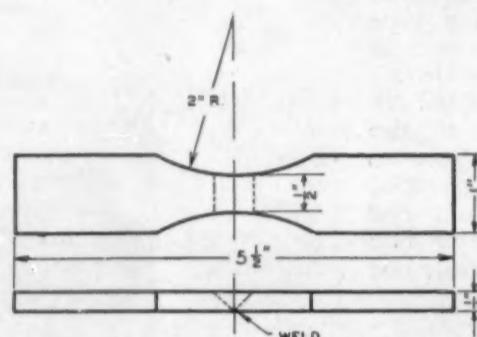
Corrosion—Tensile Weld Specimen
